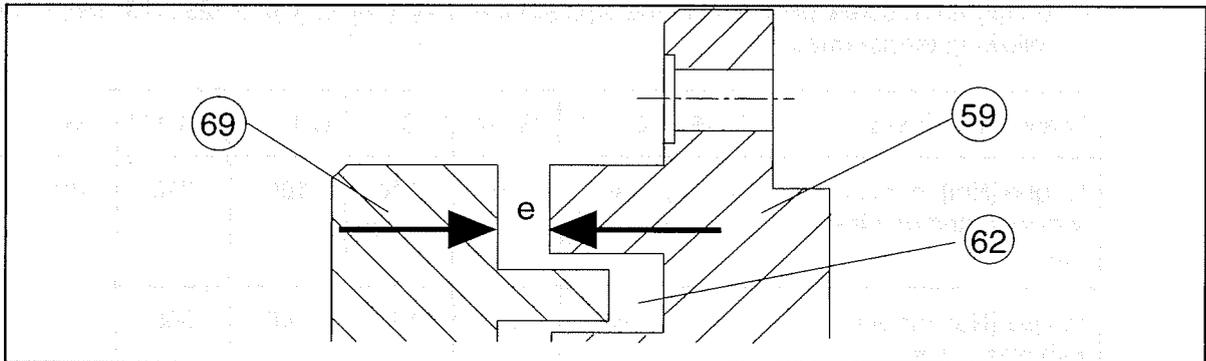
Clearance between dust flinger and rigid labyrinth seal
